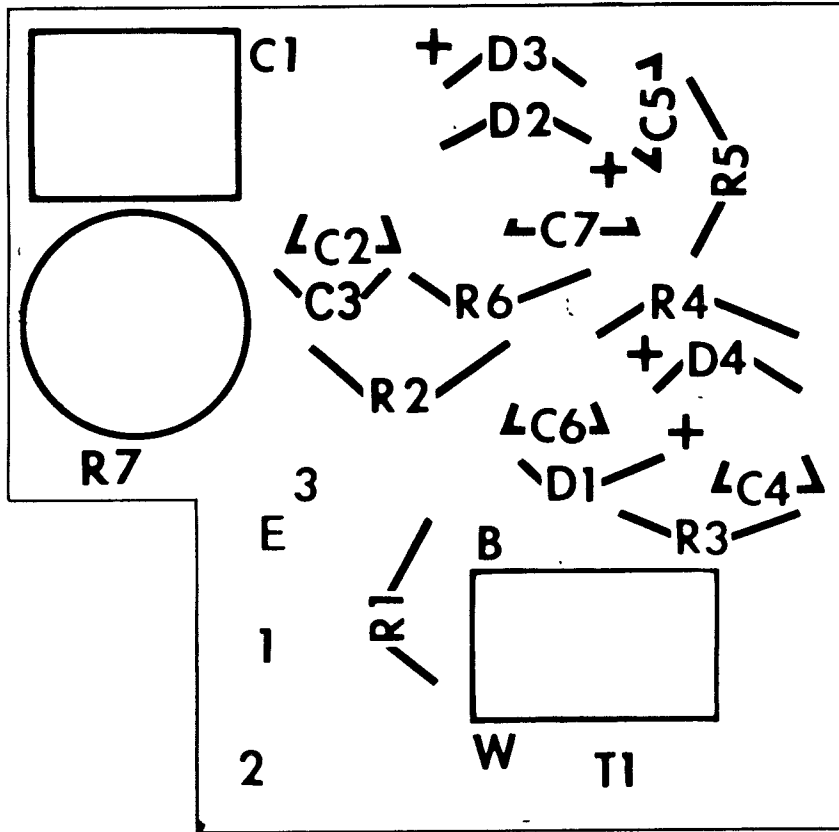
Coil, motor and gearbox assembly MS451: circuit
